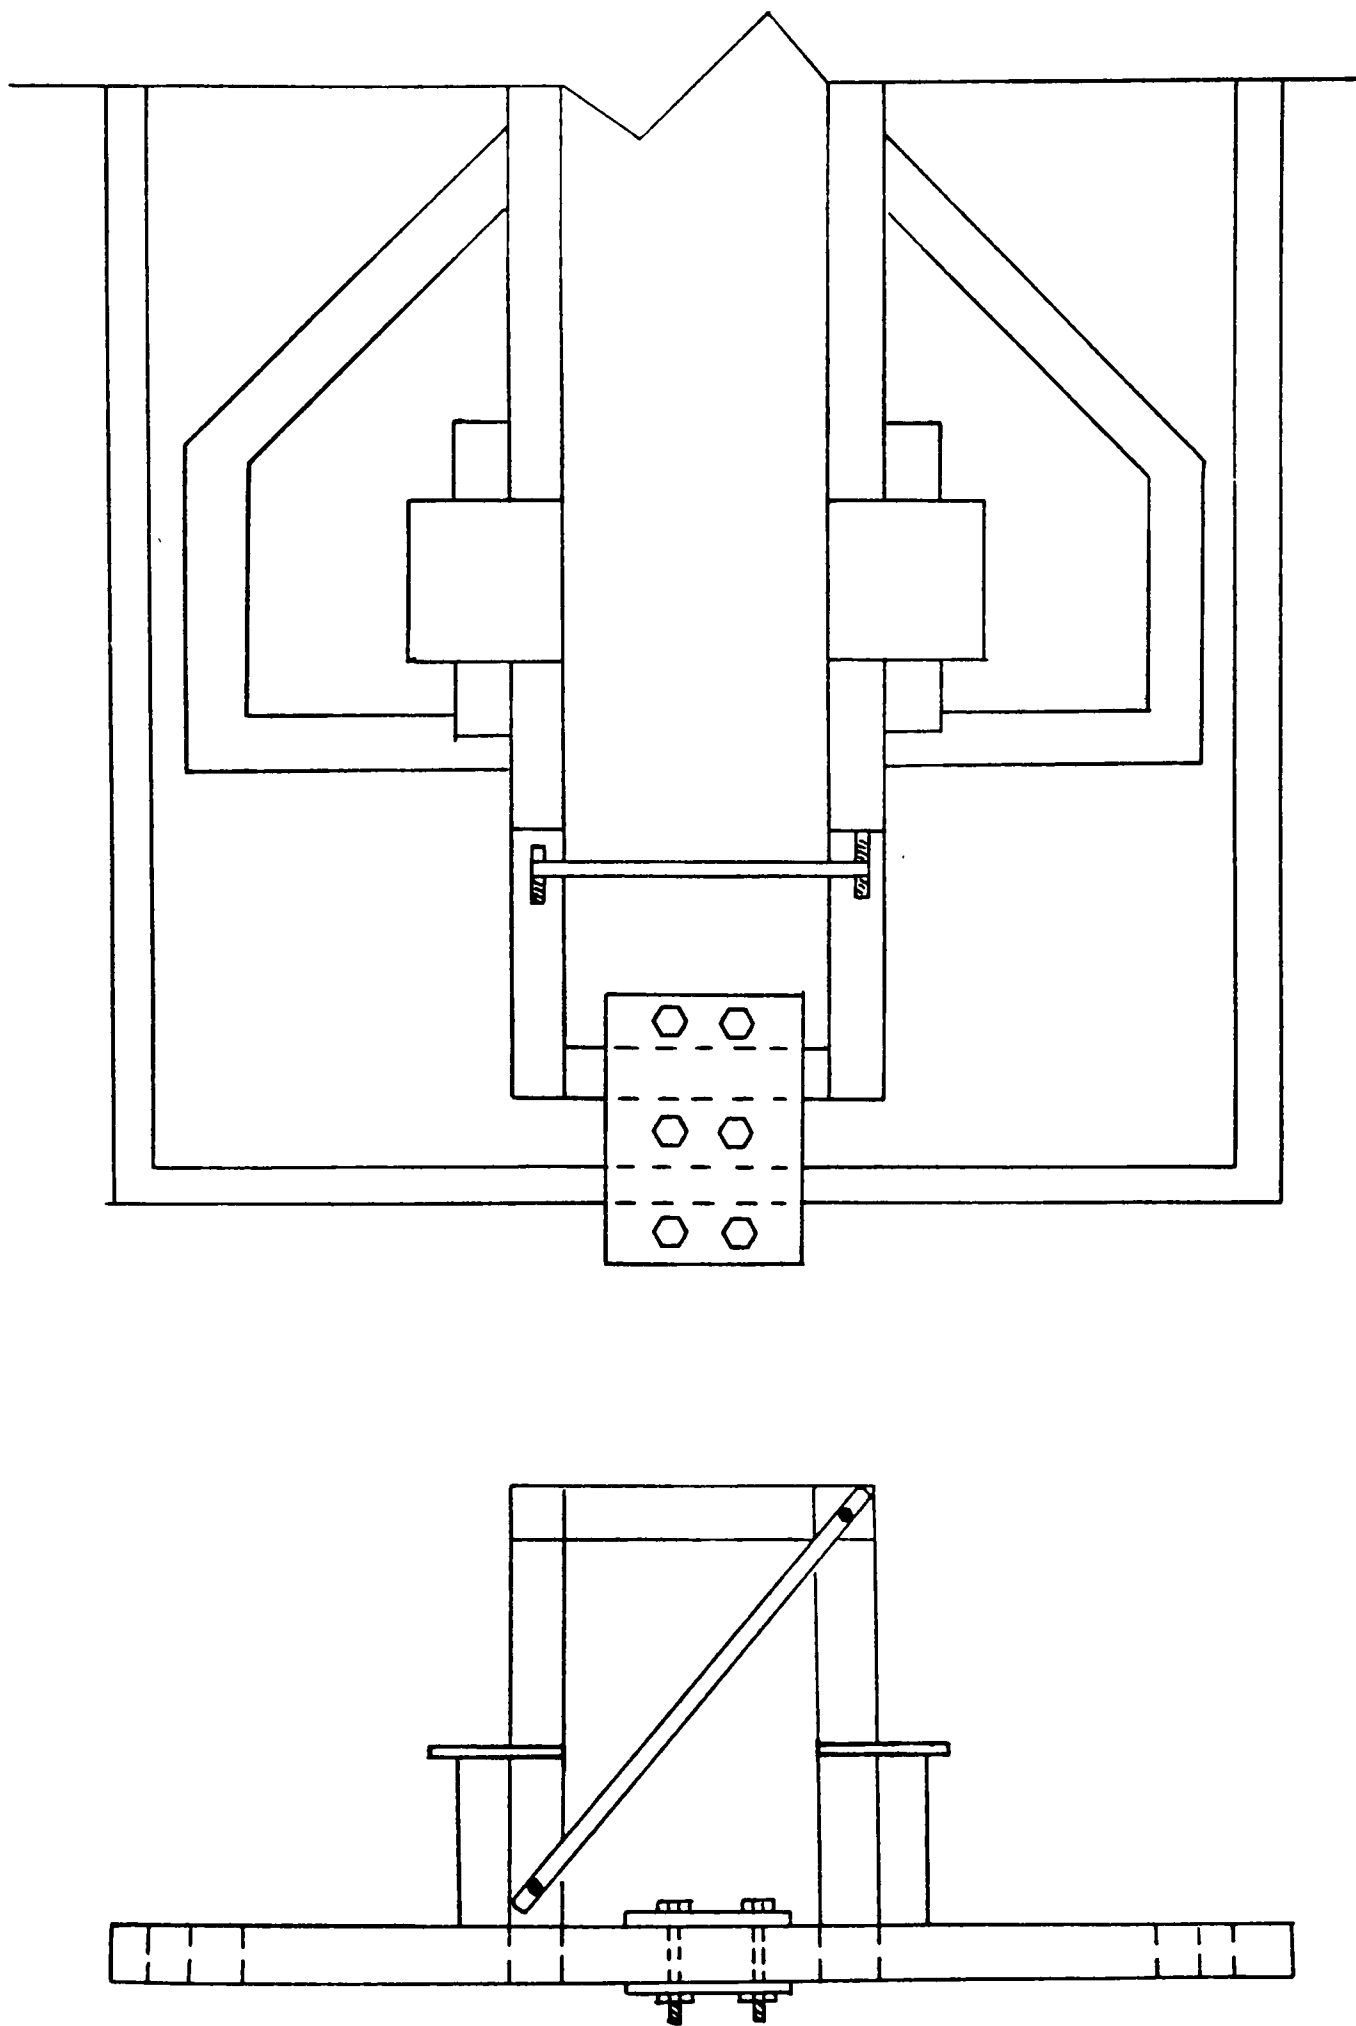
Installation Of Stabilization Torsion Rod And Horizontal Flat Plate
